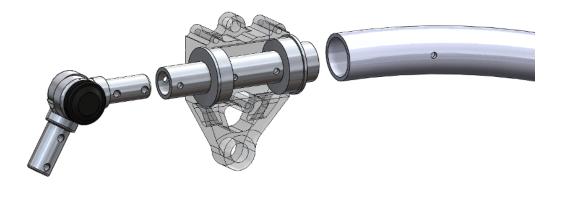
CAD assembly of revised sleeve design consisting of the following components from left to right: hinge, sleeve, clamp (transparent), and rocker tube. Note: Front half of clamp is not shown.
